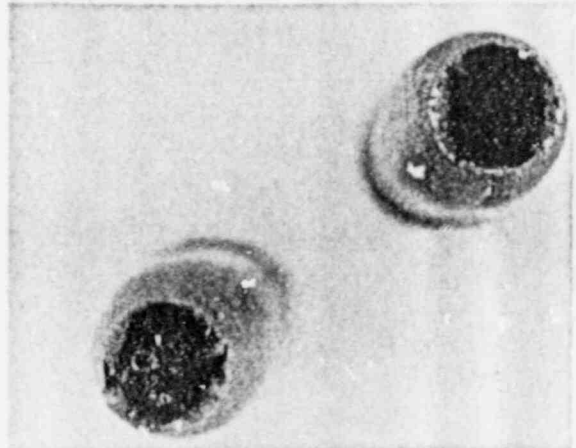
Fracture Location, Necking Behavior, and Fracture Appearance for Irradiated Base Metal Tensile Specimens
